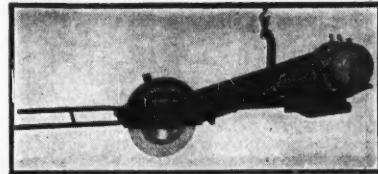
Device for Checking Length and Skew of Cylindrical Workpieces
